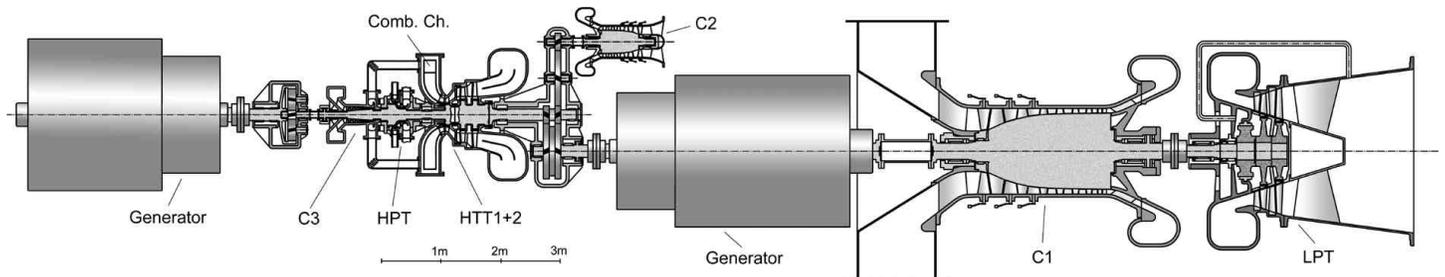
General optimised arrangement of turbomachines for a 92 MW prototype unit
